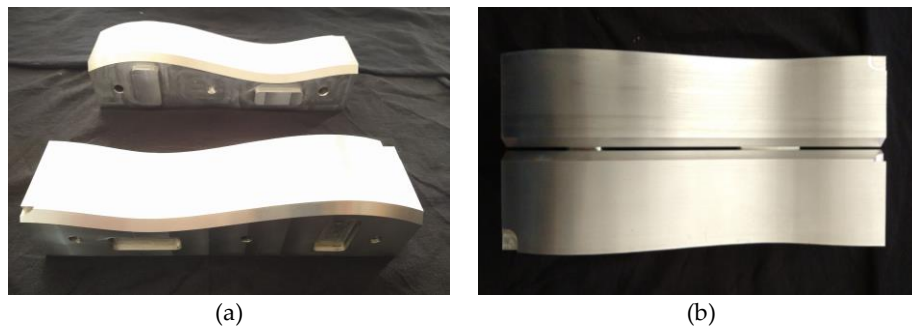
Workpiece manufactured in 6061 T6 aluminum, a) separated plates and b) plates joined forming a V-type joint.
